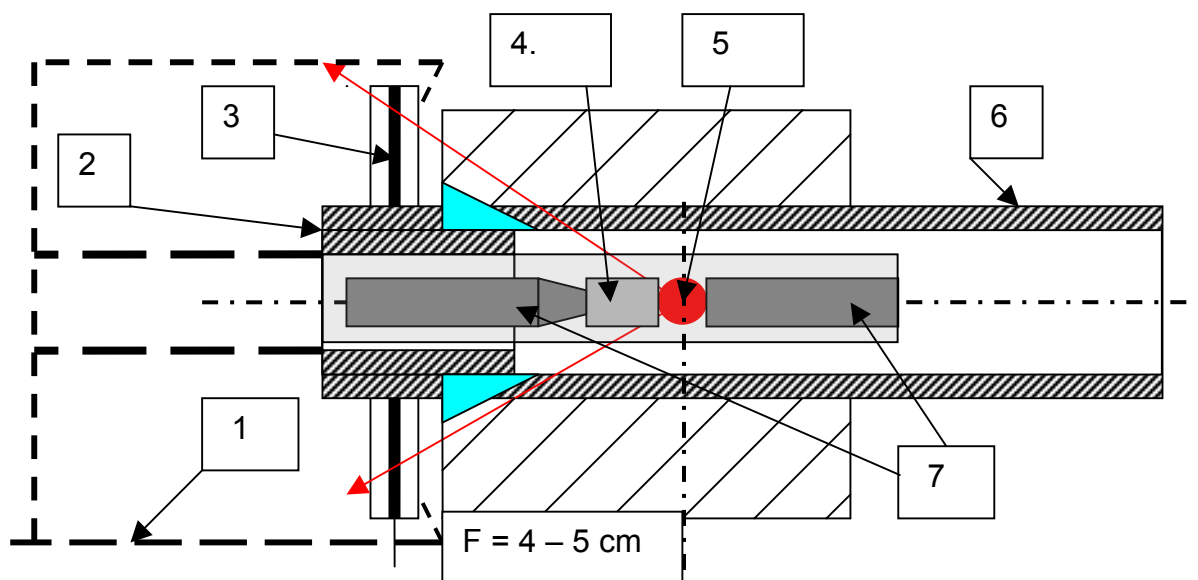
Scheme of the panoramic raying welds "tube - tube plate".
